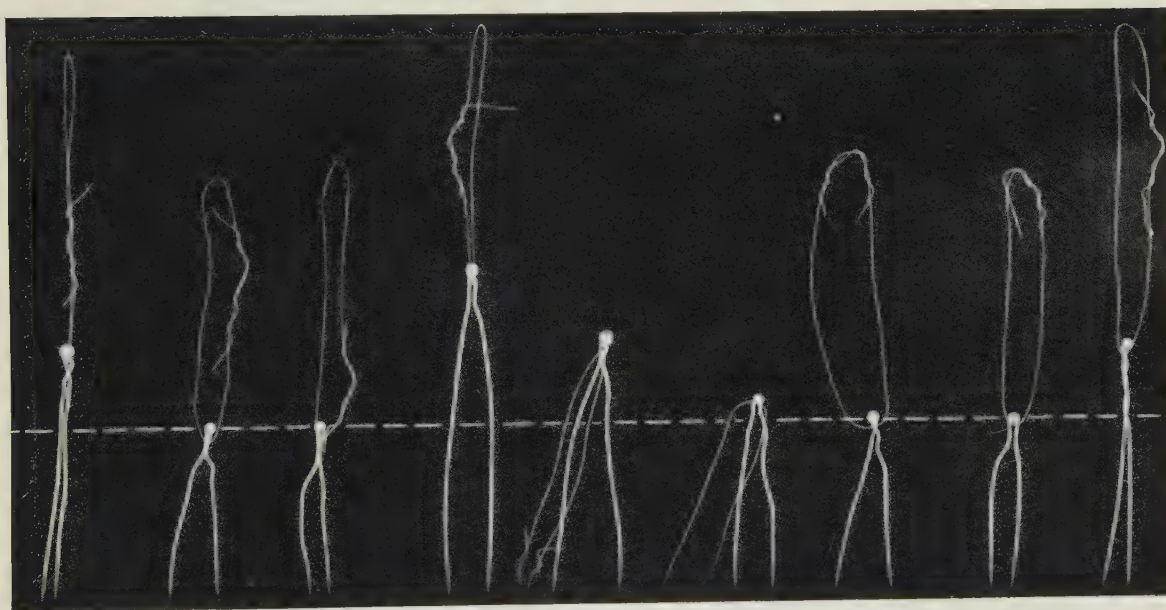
Radiograph of a Billet Slice, Showing Final Position of Thermocouples.
